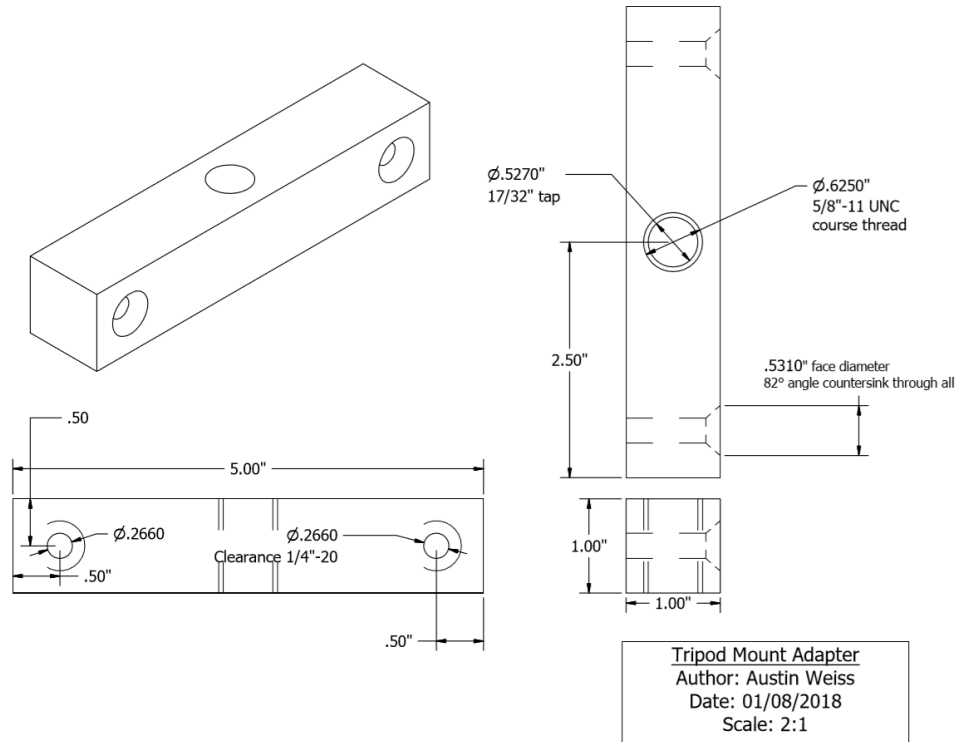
Custom aluminum tripod adapter for 6 ft horizontal 8020 aluminum extrusion attachment.
